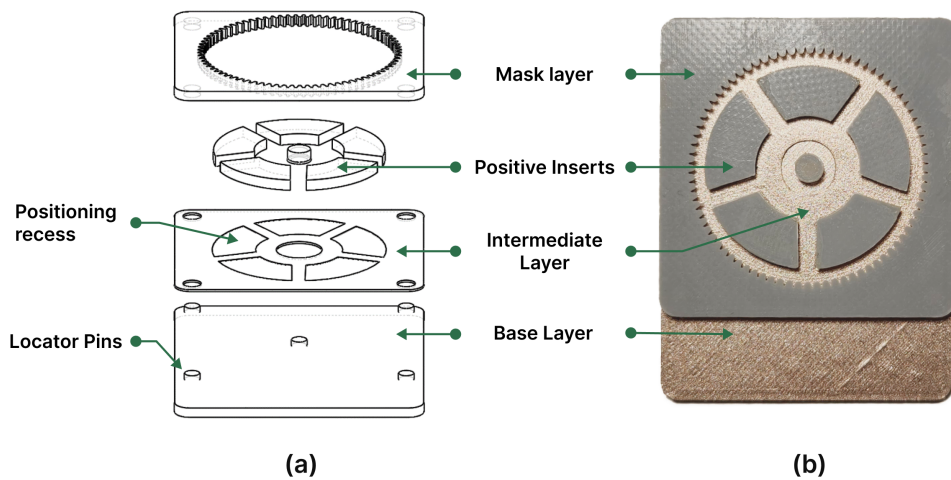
(a) A schematic depicting the center wheel mold components. (b) A photograph displaying the fully assembled mold.
